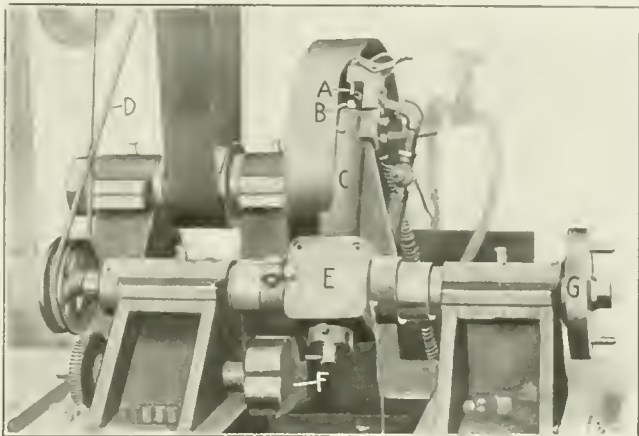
Automatic Grinder in which Bearings are rough-ground
